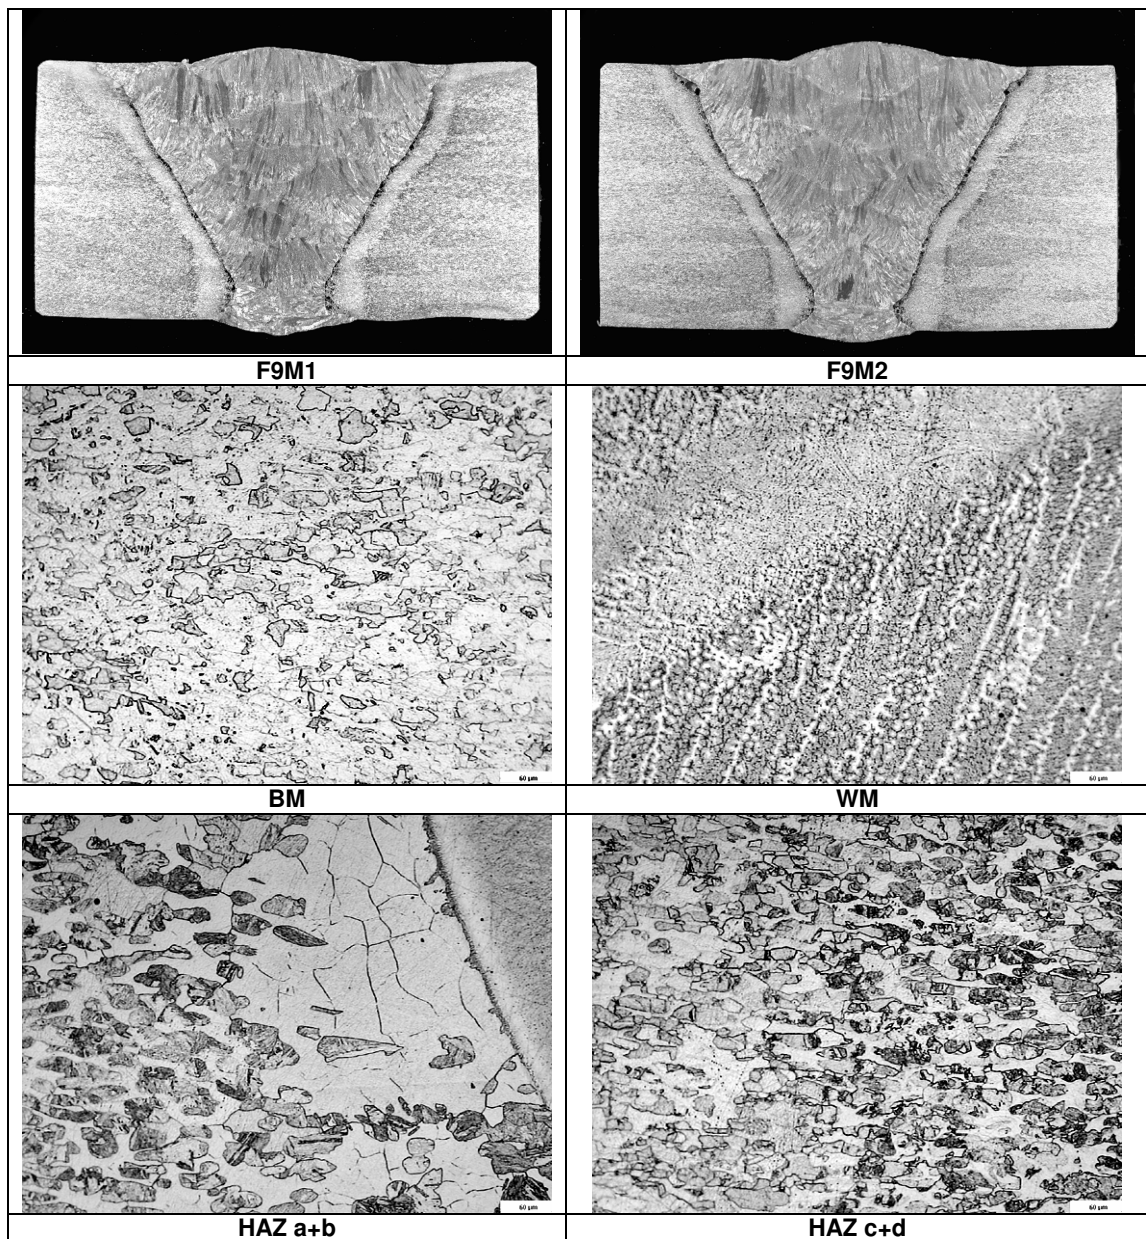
Macro and microphotographs of 20 mm thick FCAW weld with 309 filler metal (F9).
